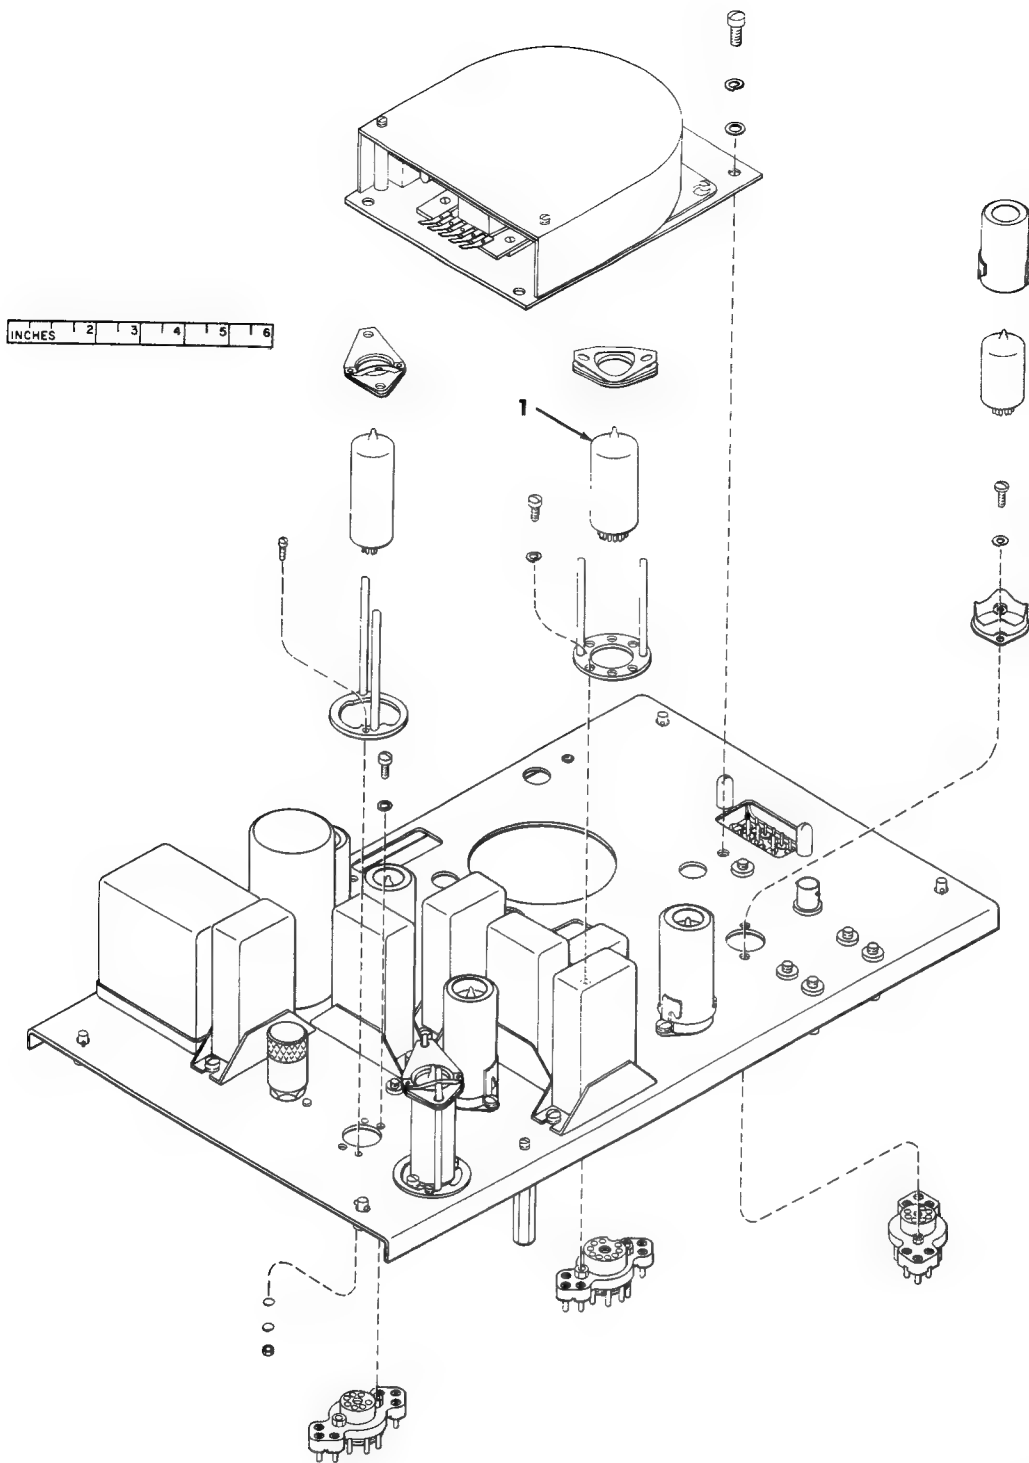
Oscilloscope OS-49/M (8007722)—partial exploded view
